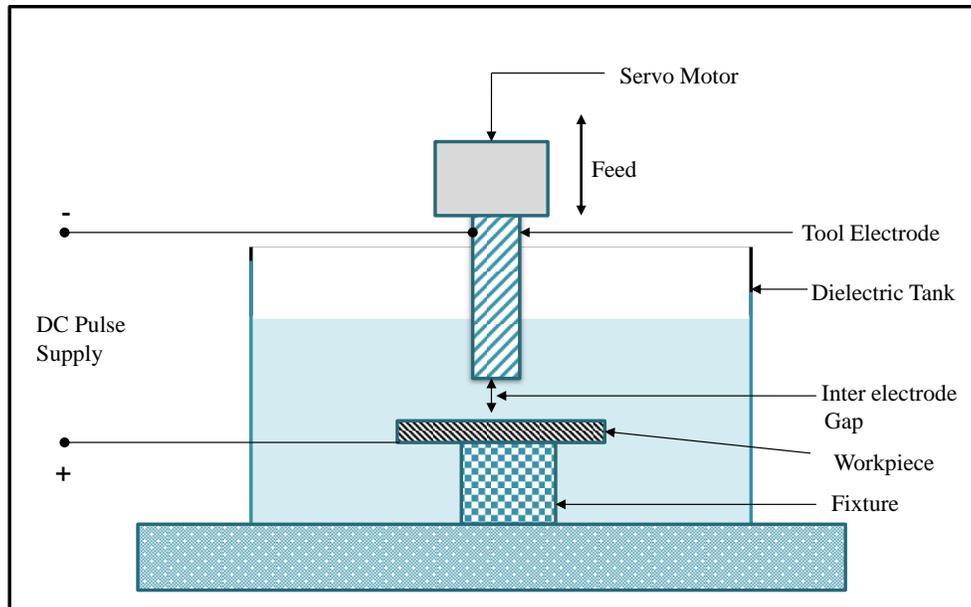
Schematic of an Electric Discharge Machining (EDM) machine tool
